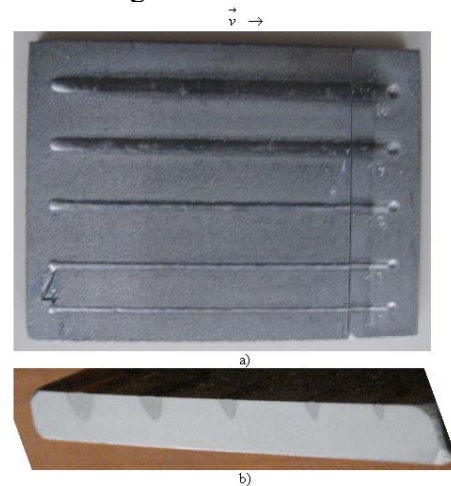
Welds on steel plate a) Plate surface b) Cross-section for welds
